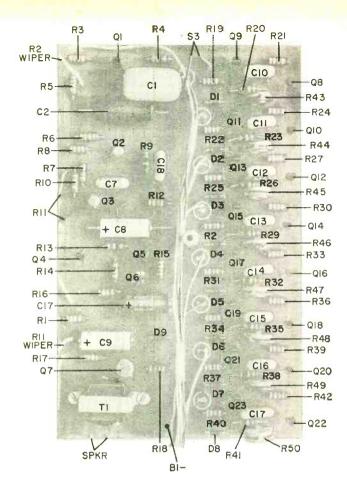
Actual size printed circuit etching guide is shown on opposite page; component placement on board is shown at right. Refer to packages or cases for transistor lead identification.
